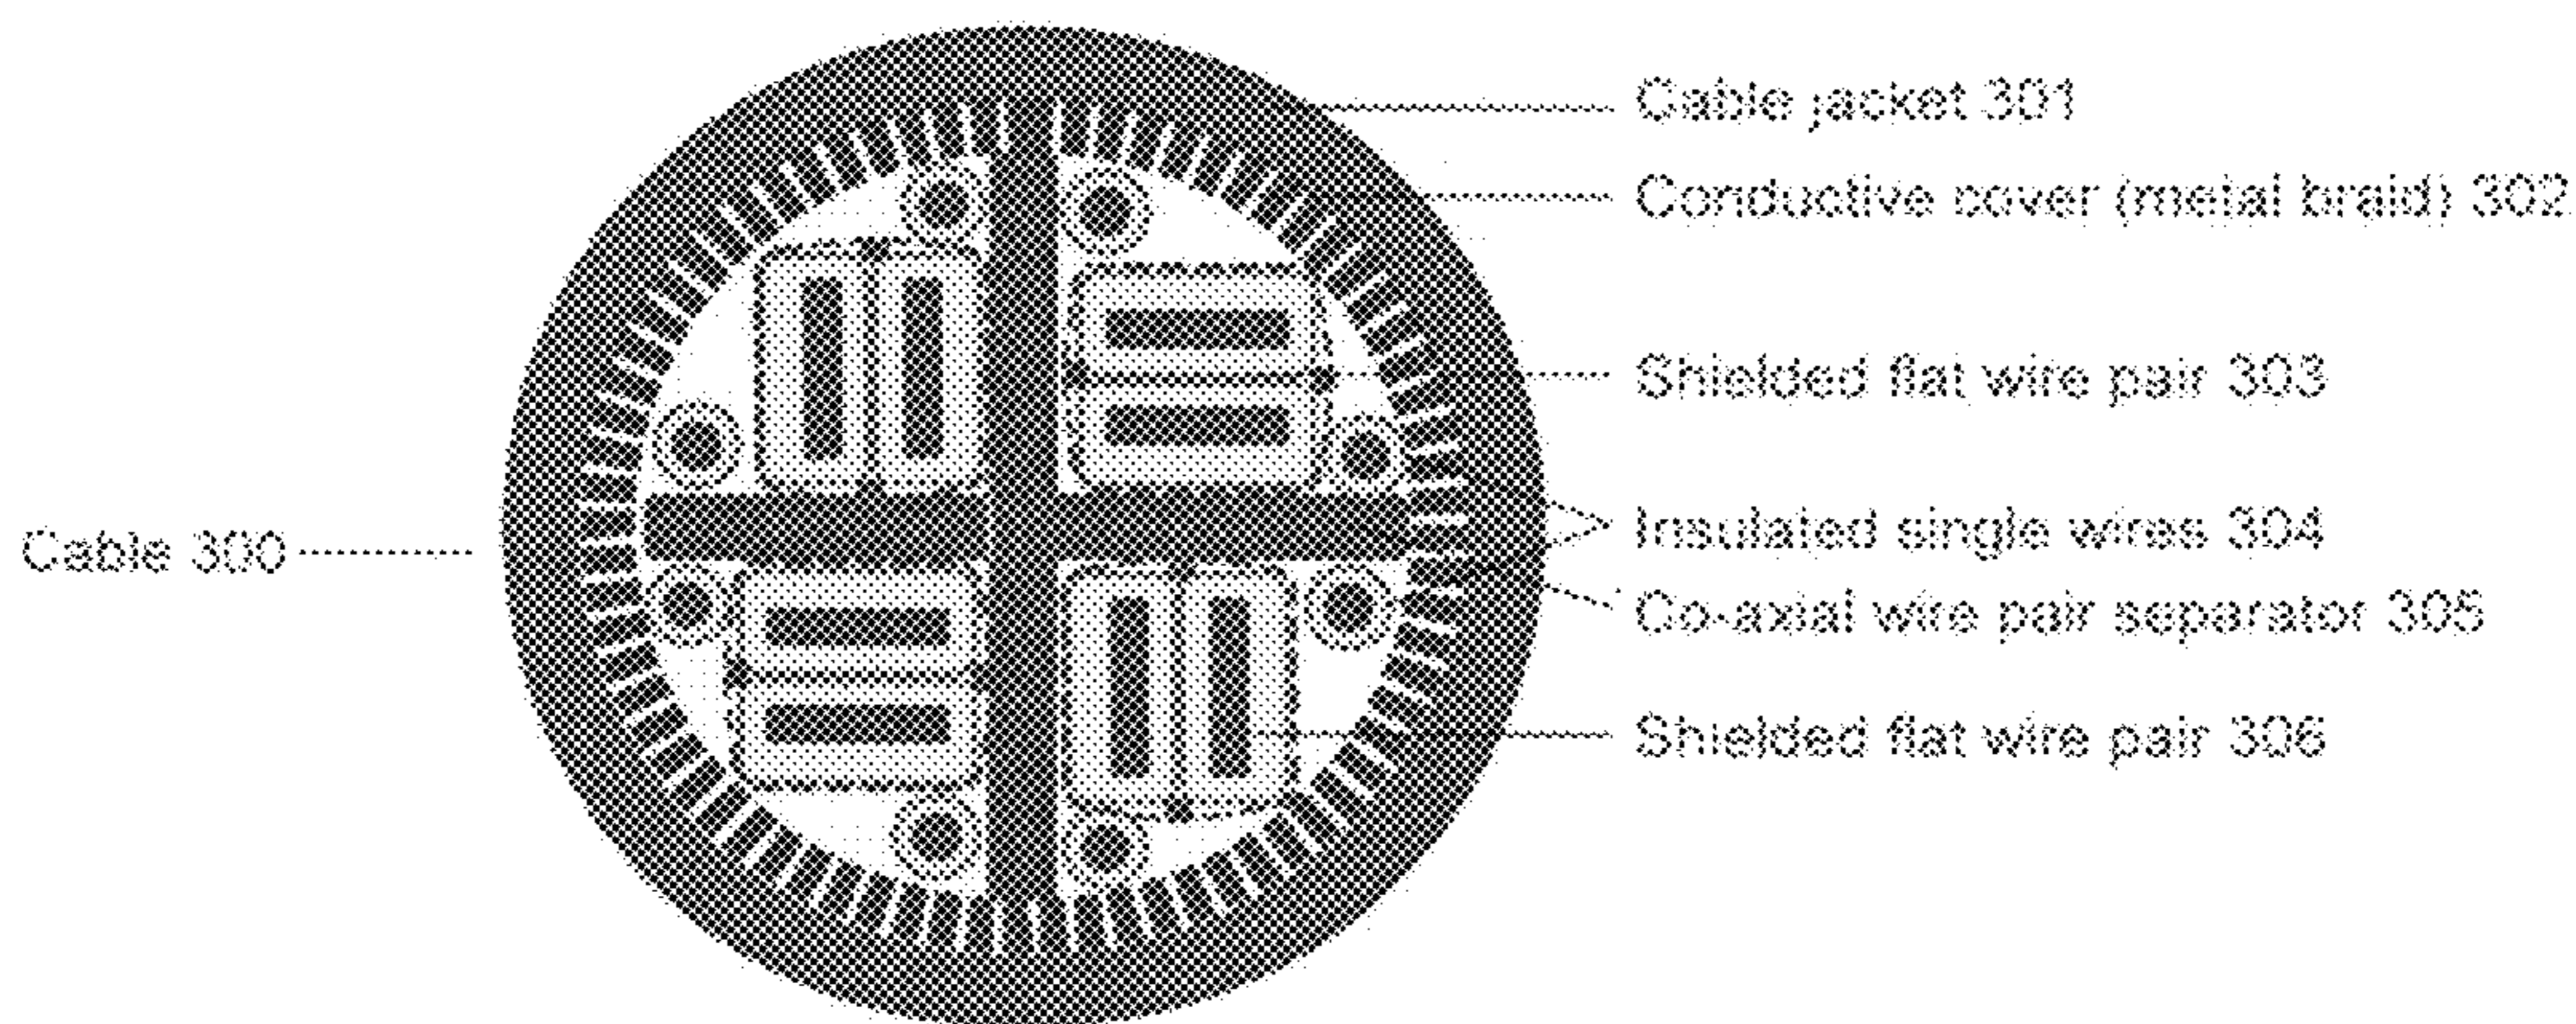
Multichannel flat wire pair cable with co-axial separator
